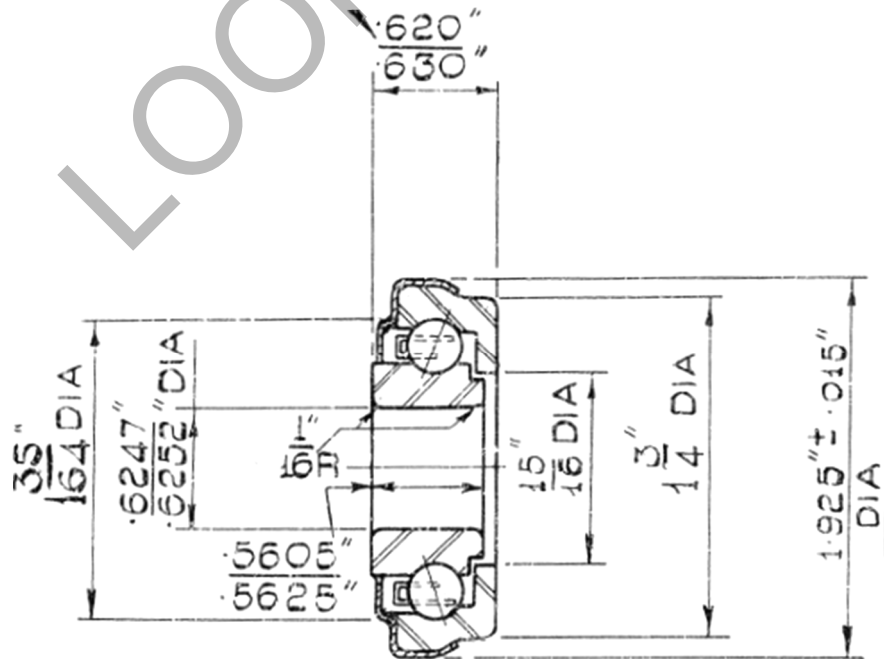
Clutch release bearing 2A3653.
